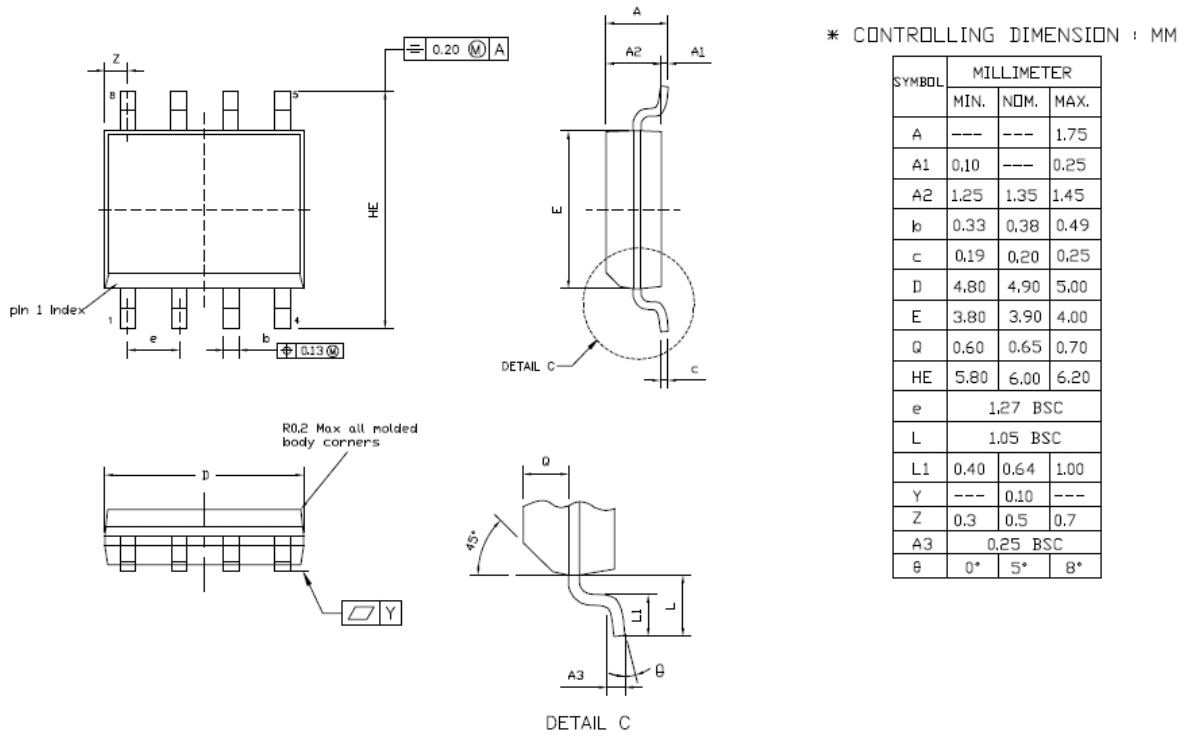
SOP8(150 mil) Package Shape and Dimension in millimeters (inches)
